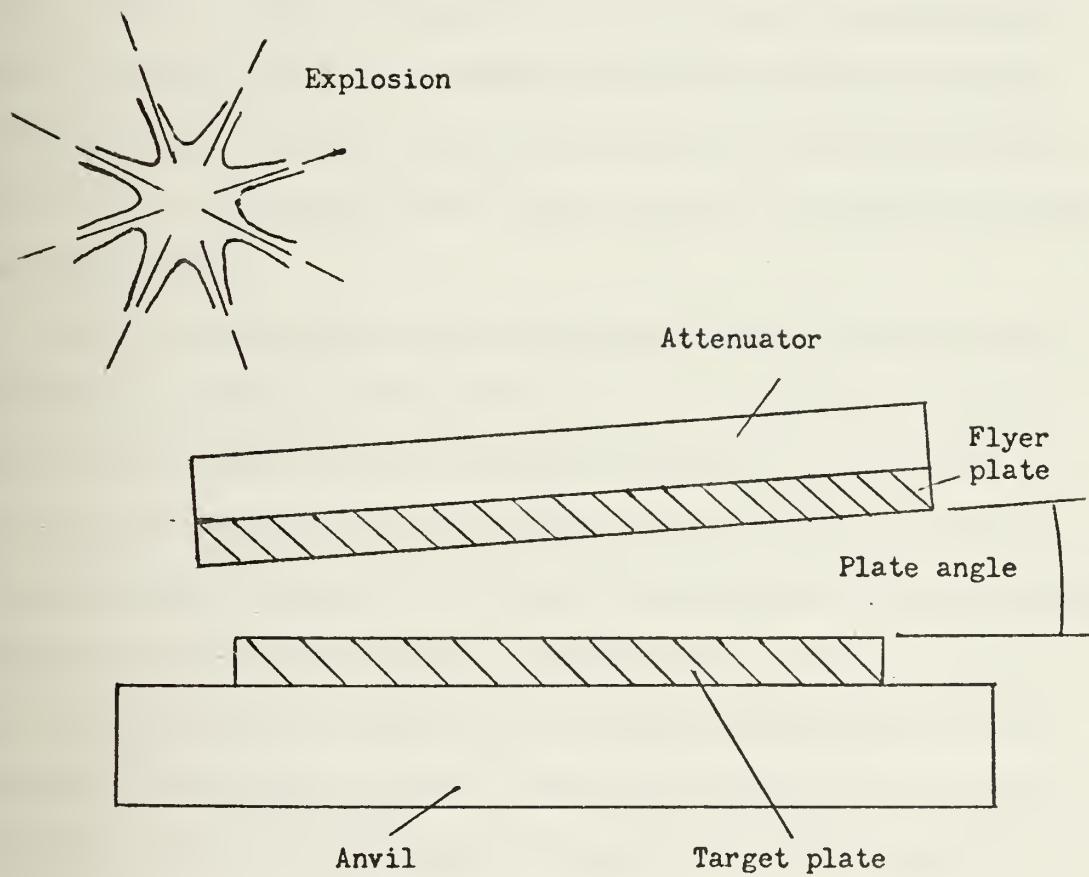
Arrangement for Explosive Welding 50
